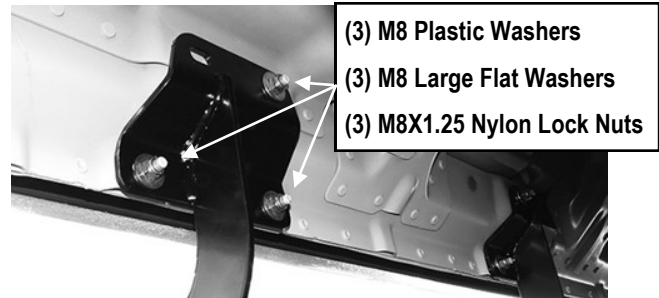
Thread Plastic Washers Onto 3 Mounting Studs. Passenger Side Front Mounting Location Pictured
